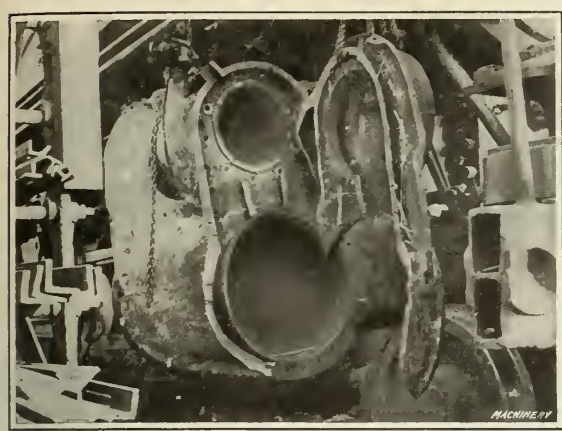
Fractured Steam Chest and Cylinder on Locomotive to be welded
